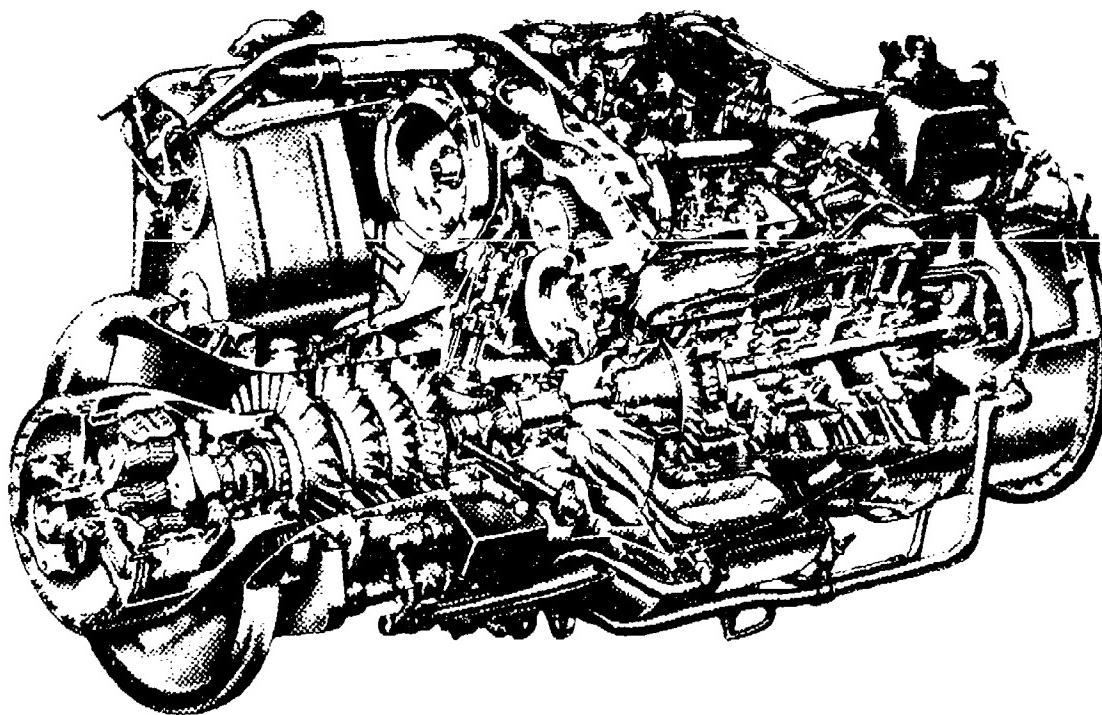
The Rolls-Royce Gem 2 three shaft (700 KW) gas turbine engine
